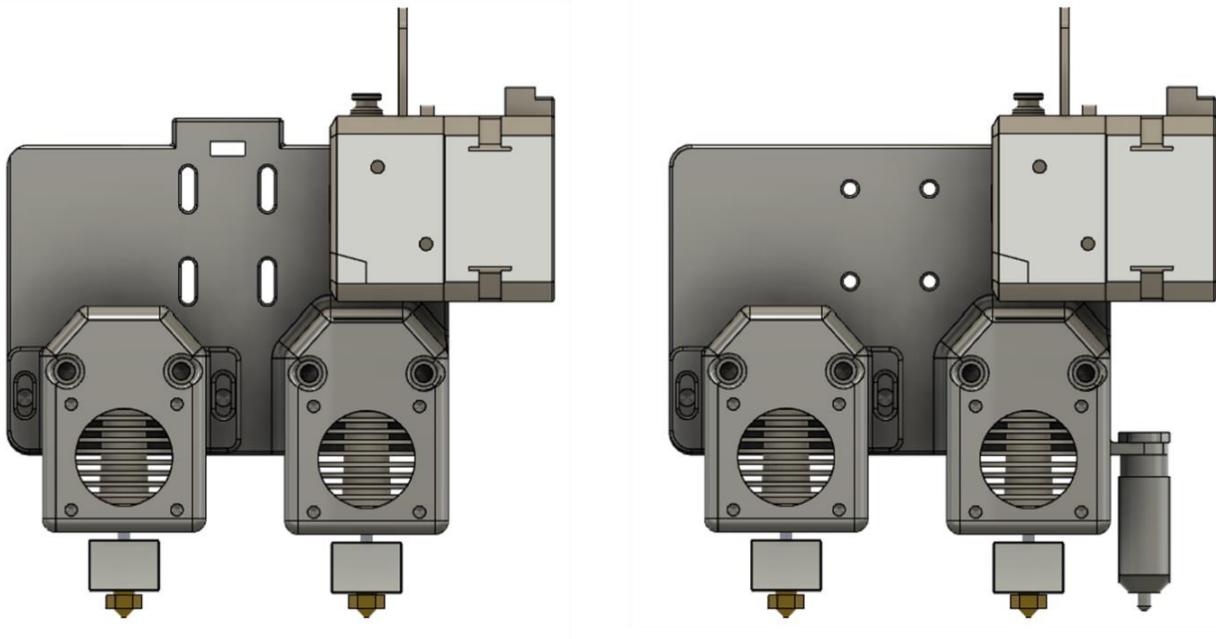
Fully assembled Quadro-extruder configuration, left secondary and right primary assembly.
